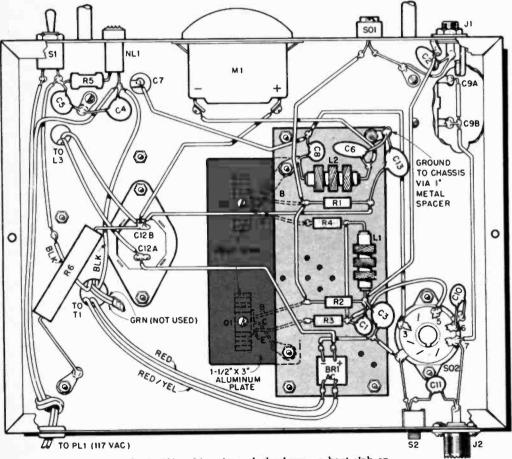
Area shown in color is 1½ x 3-in. piece of aluminum—a heat sink on which Q1 and Q2 are mounted. Gray area is perforated circuit board. Parts are grounded to the chassis by a 1-in. spacer at upper right corner of the board.
